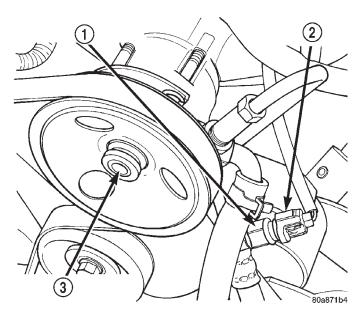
Power Steering Pressure Switch— 2.5L Engine
